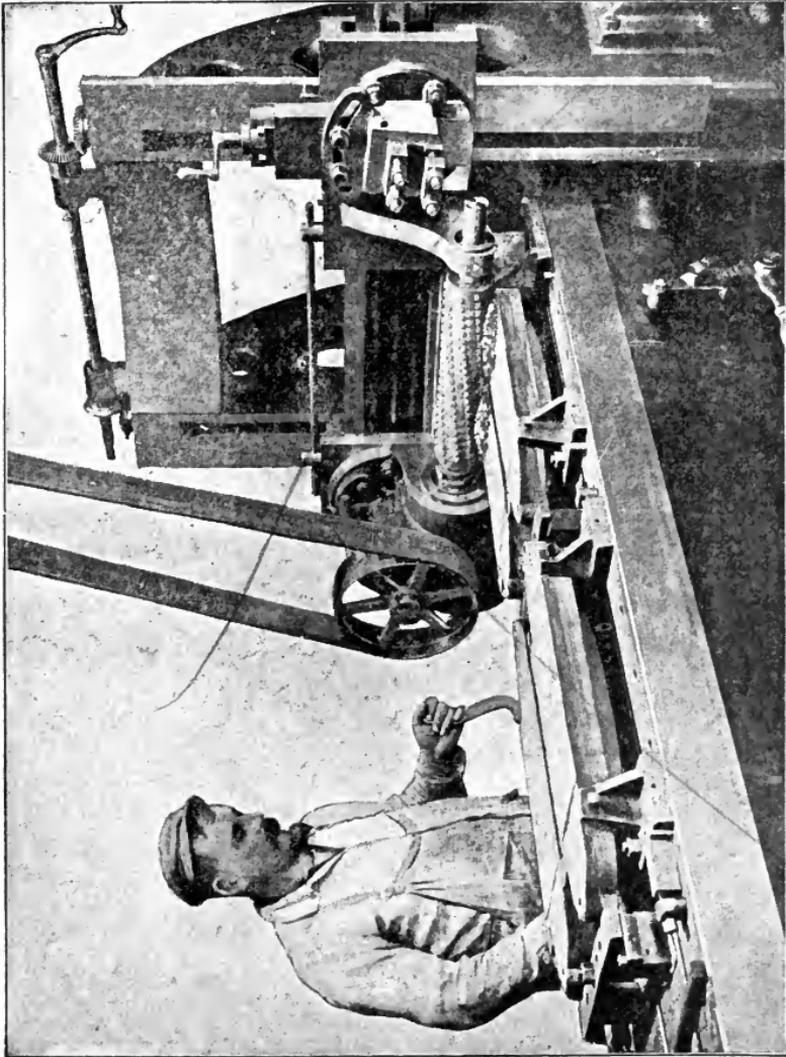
Planer Equipped with Horizontal Milling Attachment
